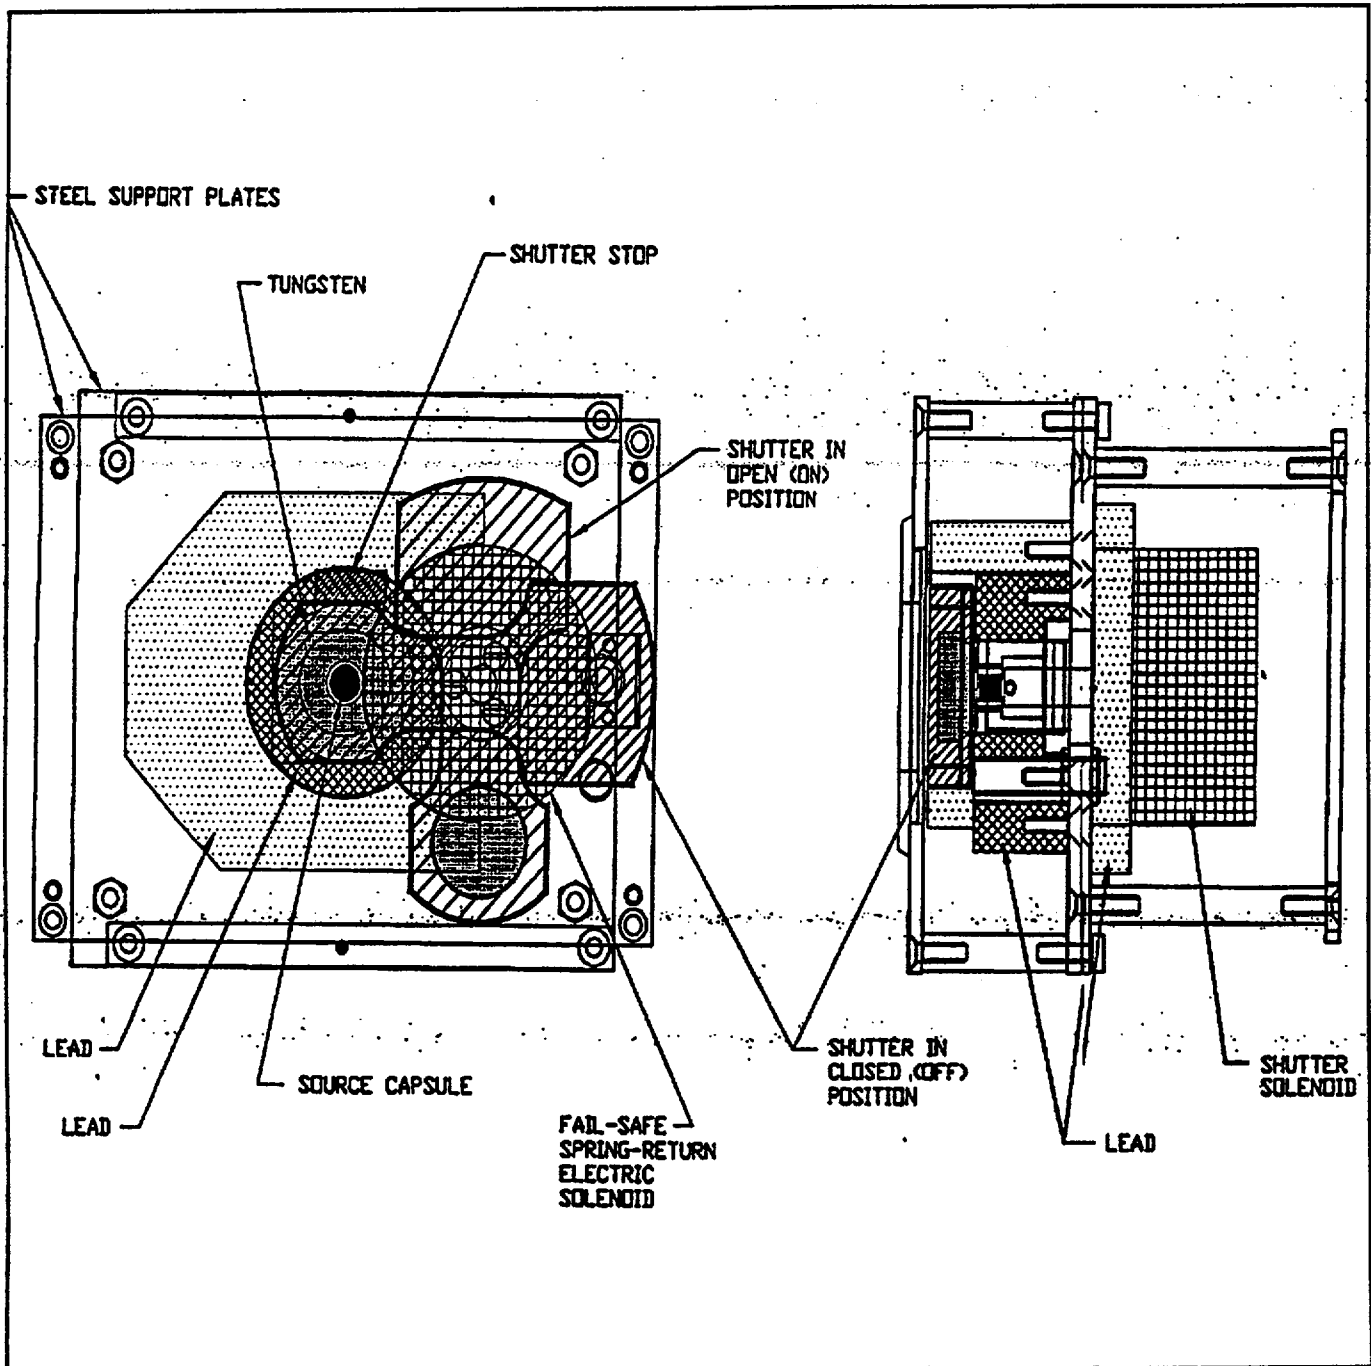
Model 303 Source Holder / Solenoid / Shutter / Shielding Assembly
